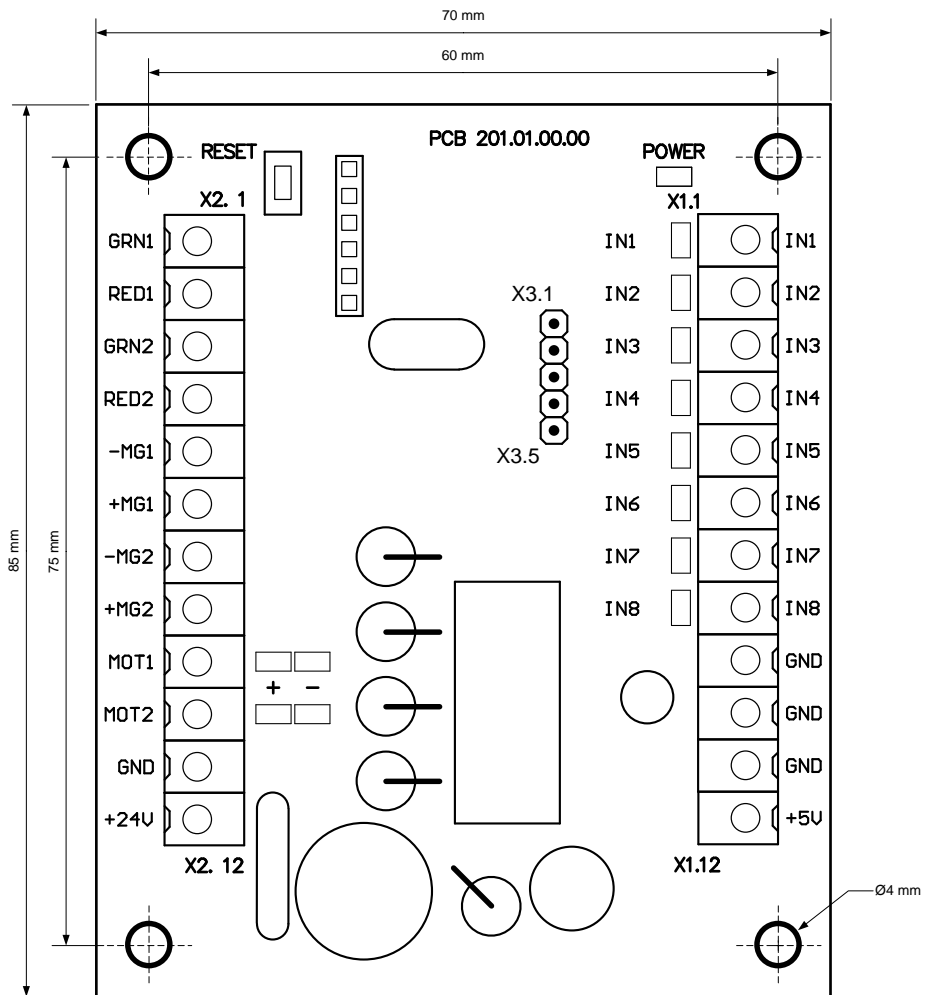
Design, overall and installation dimensions of the controller PCB.201.01.00.00
